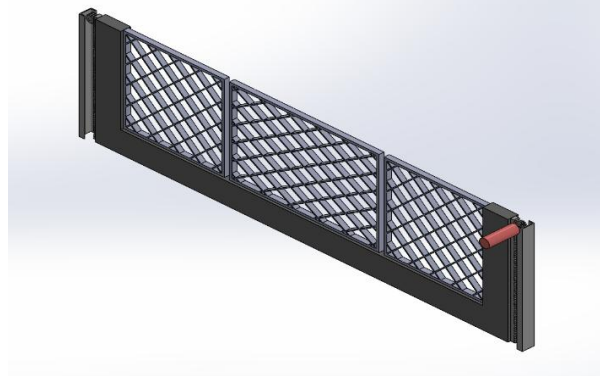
CAD assembly of the barricade frame and mesh panels (SolidWorks 2020).
